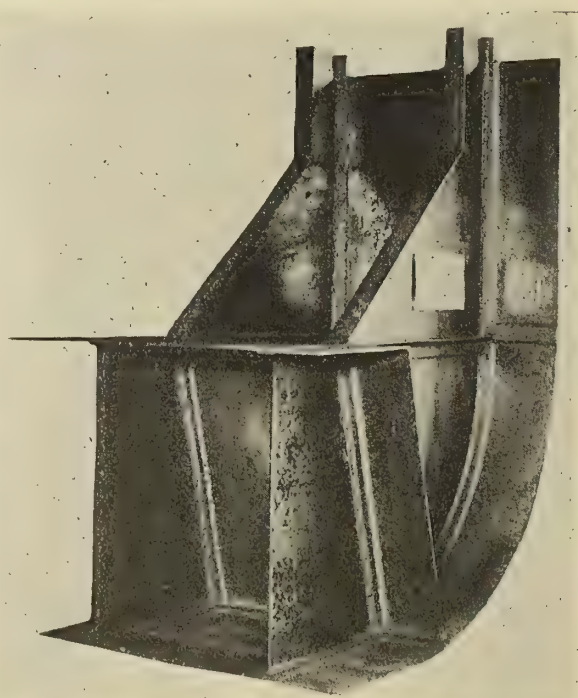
Quarter View of Bilge Section of Rivetless Cargo Ship
